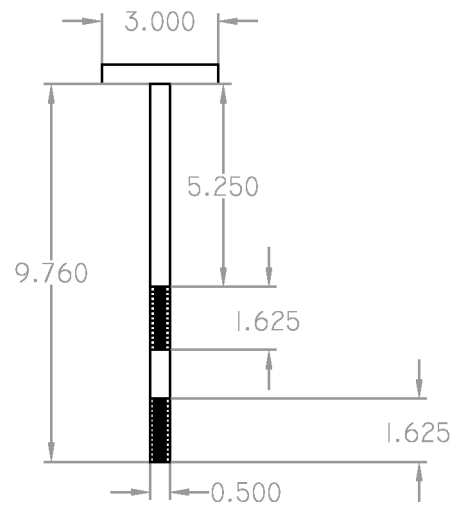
(continued) Blueprints of the parts used to build the first version of the heat flow measurement device: (c) upper and lower walls, (d) handle. Dimensions are in inches.
